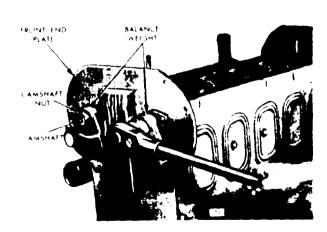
B-142. Loosen Nut on Camshaft or Balance Shaft
